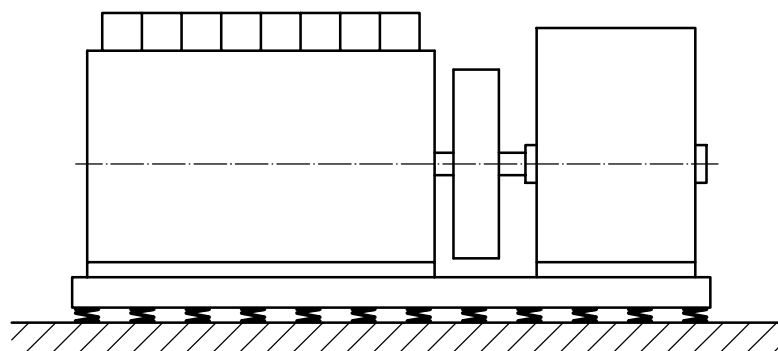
Engine and generator rigidly mounted on resiliently mounted base frame
